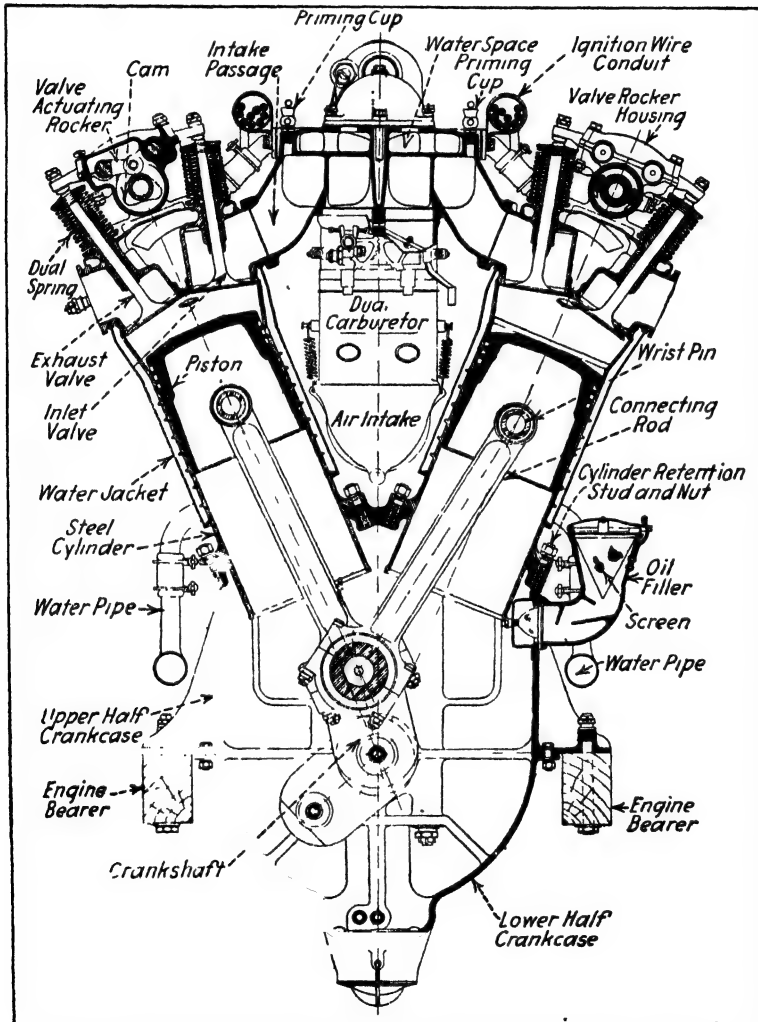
Transverse Sectional View Through Cylinders of Liberty Airplane Engine, a Good Example of the "Vee" Water-Cooled Type Having Overhead Valves. This Engine is an Obsolescent Design.
